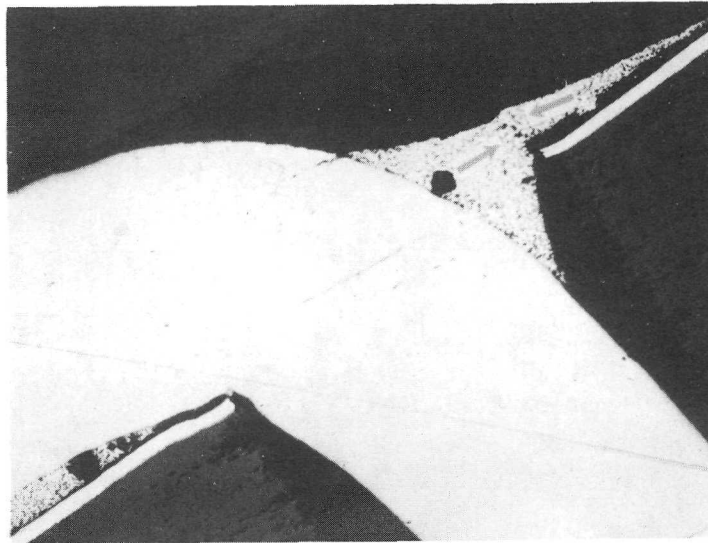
Cracked solder at heel of the clinched lead. (This indicates that the bond of solder to the pad was greater than the strength of the solder. This solder separated from the pad after the crack relieved the strain.)
